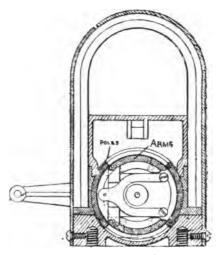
Front view of Armature, movable extension of polepieces, and electro-magnetic contact breaker of the Gianoli High tension Magneto.
